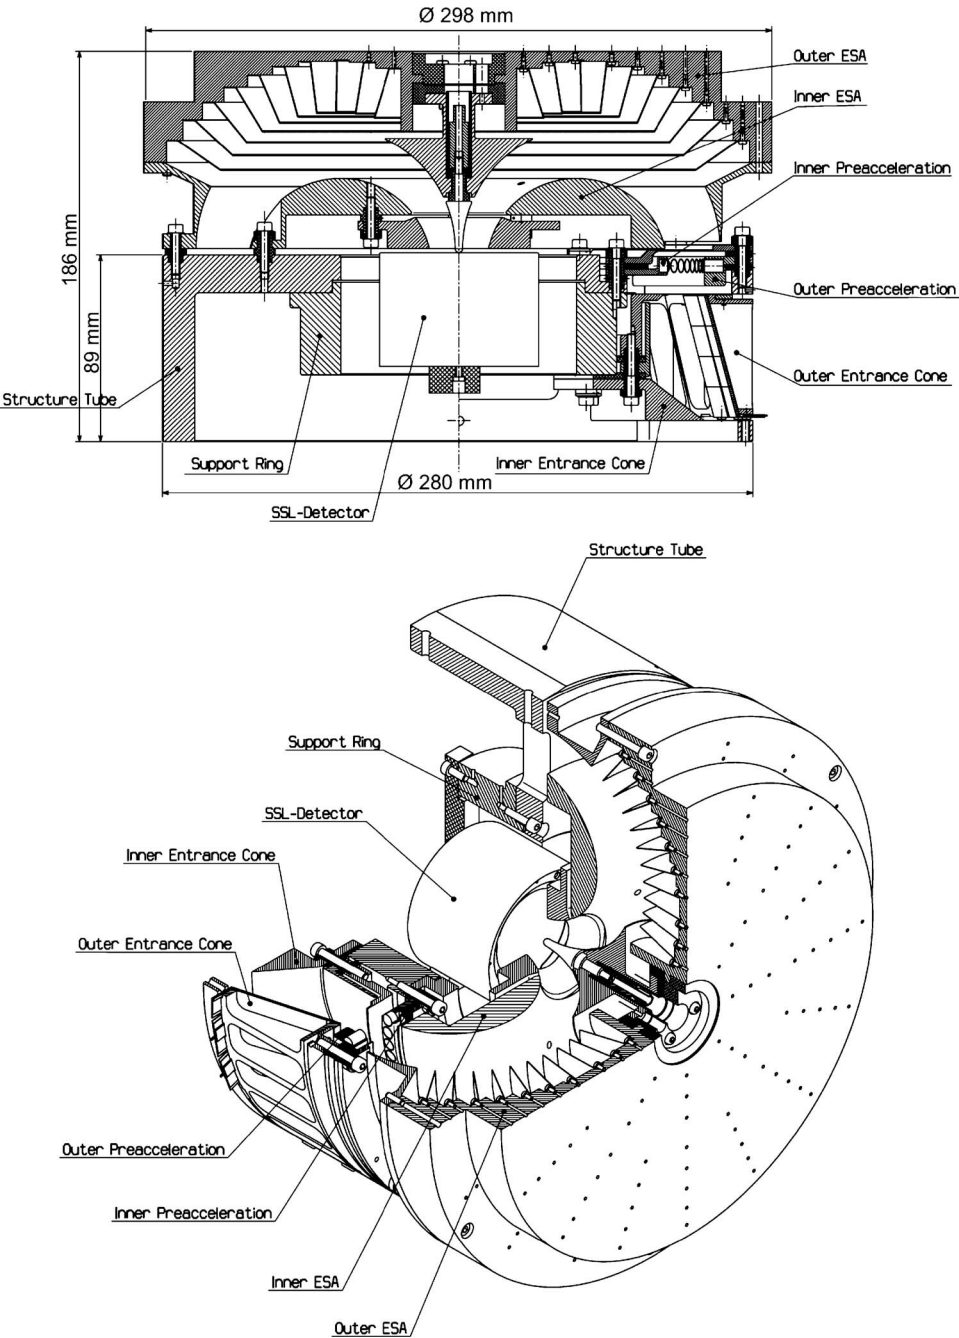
Three-dimensional cut through the IBEX-Lo prototype. Only one quarter of the circumference is equipped with conversion surfaces to reduce complexity of the prototype. The collimator is not shown in this drawing. The size of the prototype as shown is 298 mm in diameter and 186 mm in length.
